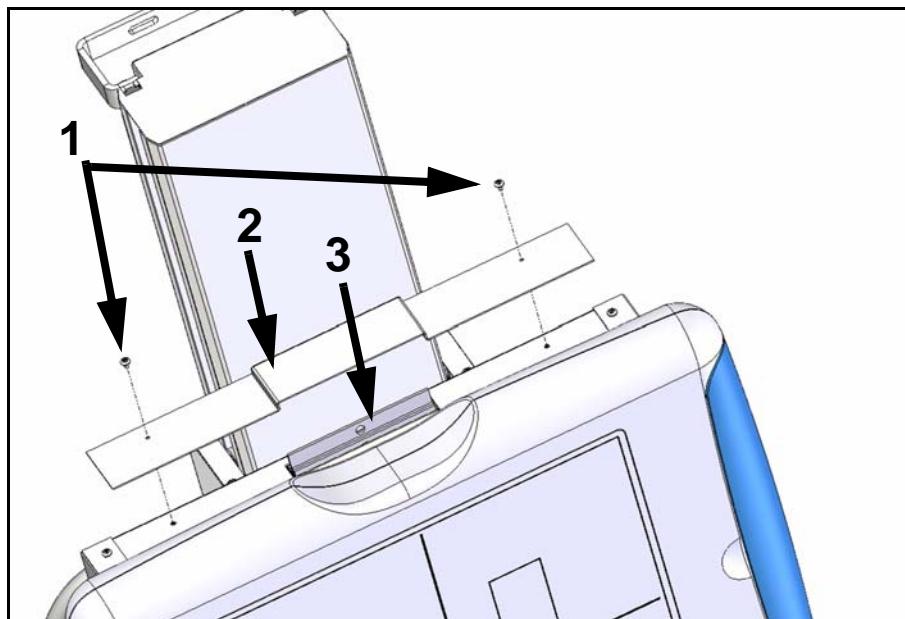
A-4. Carriage and Frame Assembly top cover
